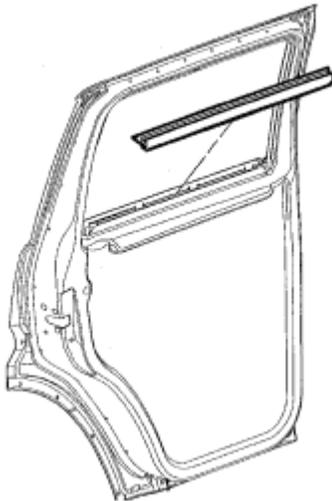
Removing/Installing Inner Belt Molding Outboard
